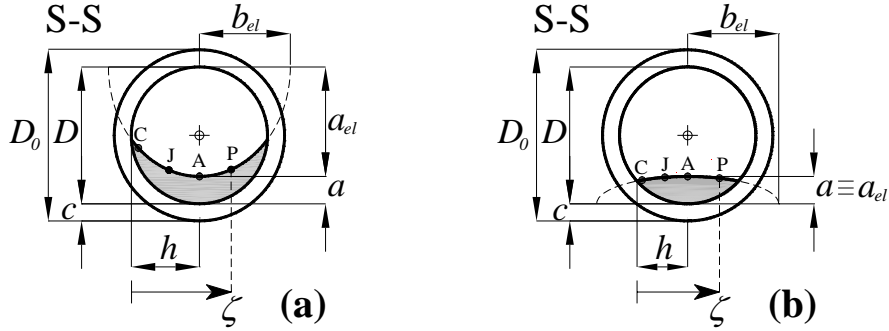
Geometrical parameters: (a) sickle -shaped surface crack; (b) almond -shaped surface crack.
